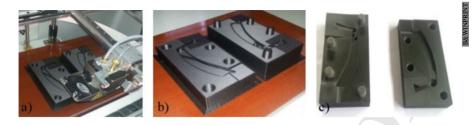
a Casting molds during its additive manufacturing, b after removing and c final
